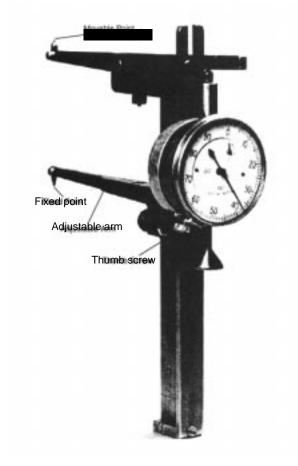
Internal Thread Taper Caliper for Pipe Less Than  $4^{1}/_{2}$ -in. OD
